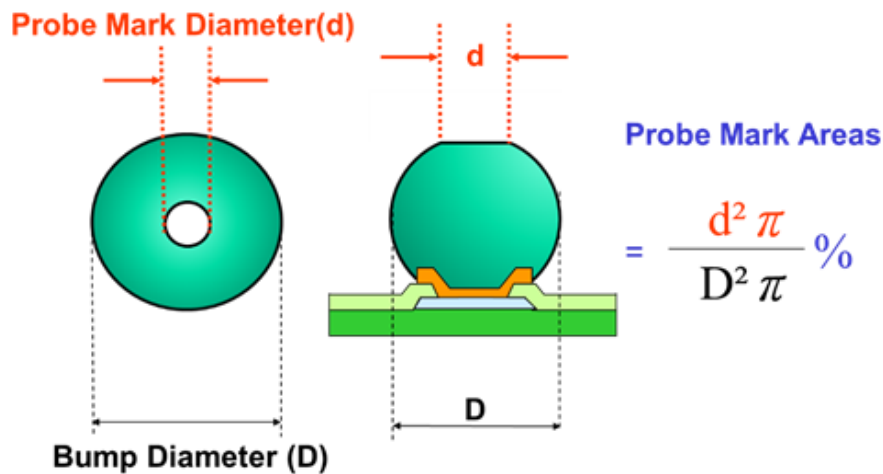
The measurement method of probe mark area ratio (from the top view of solder bump).
